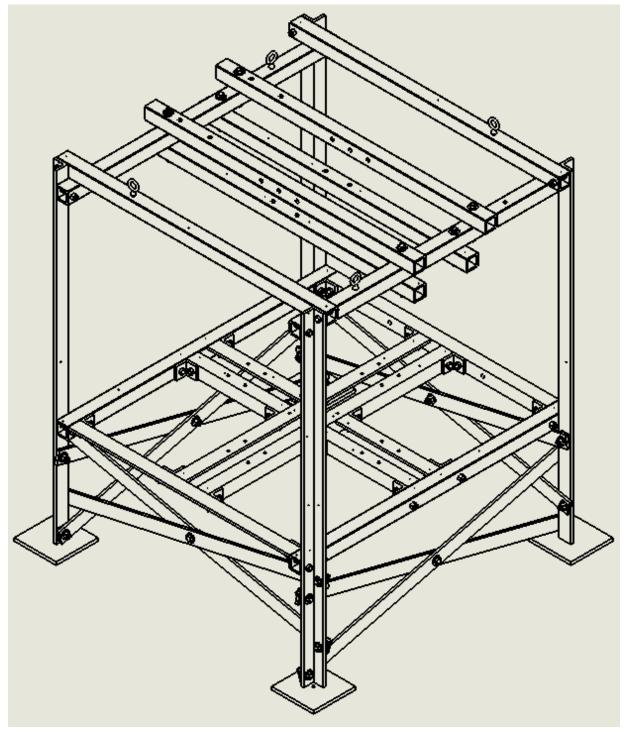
Combining all the assemblies above should yield a frame assembly as shown above
